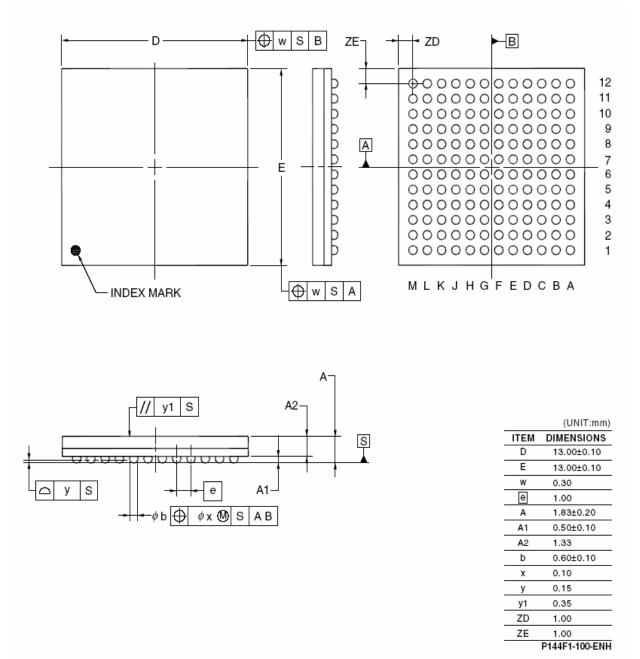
144-Ball PBGA Mechanical Drawing
